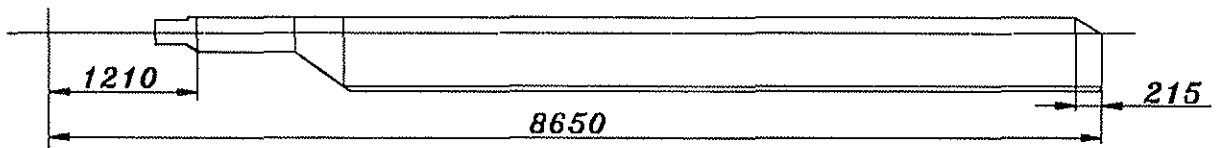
The plan view of the blade manufactured from composite materials for rotor of MI-28 helicopter.
